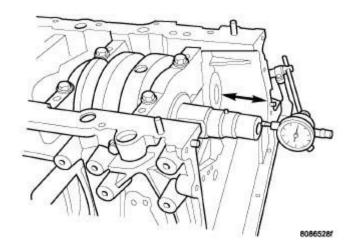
Checking Crankshaft End Play Courtesy of CHRYSLER GROUP, LLC
